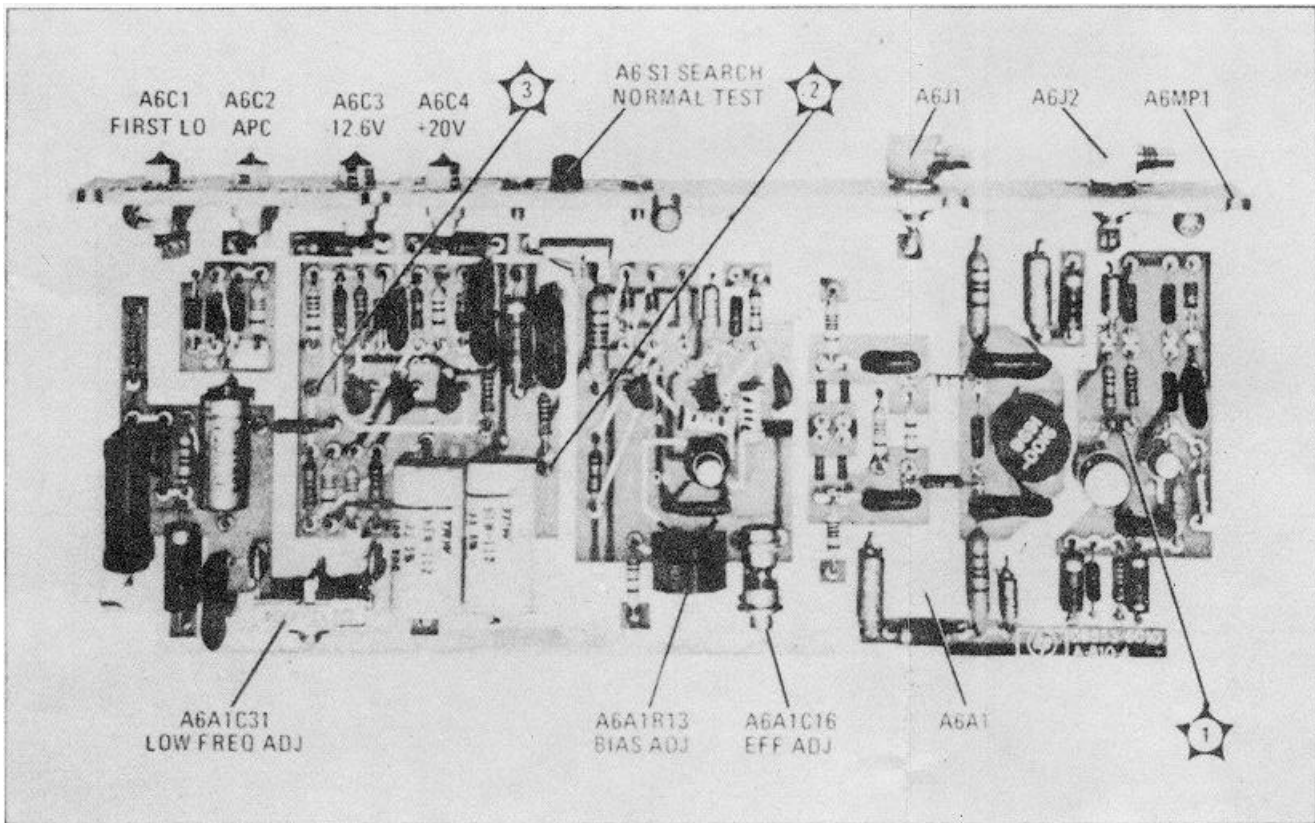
APC Assembly A6 (08553-6010) Adjustment and Test Connector Locations
